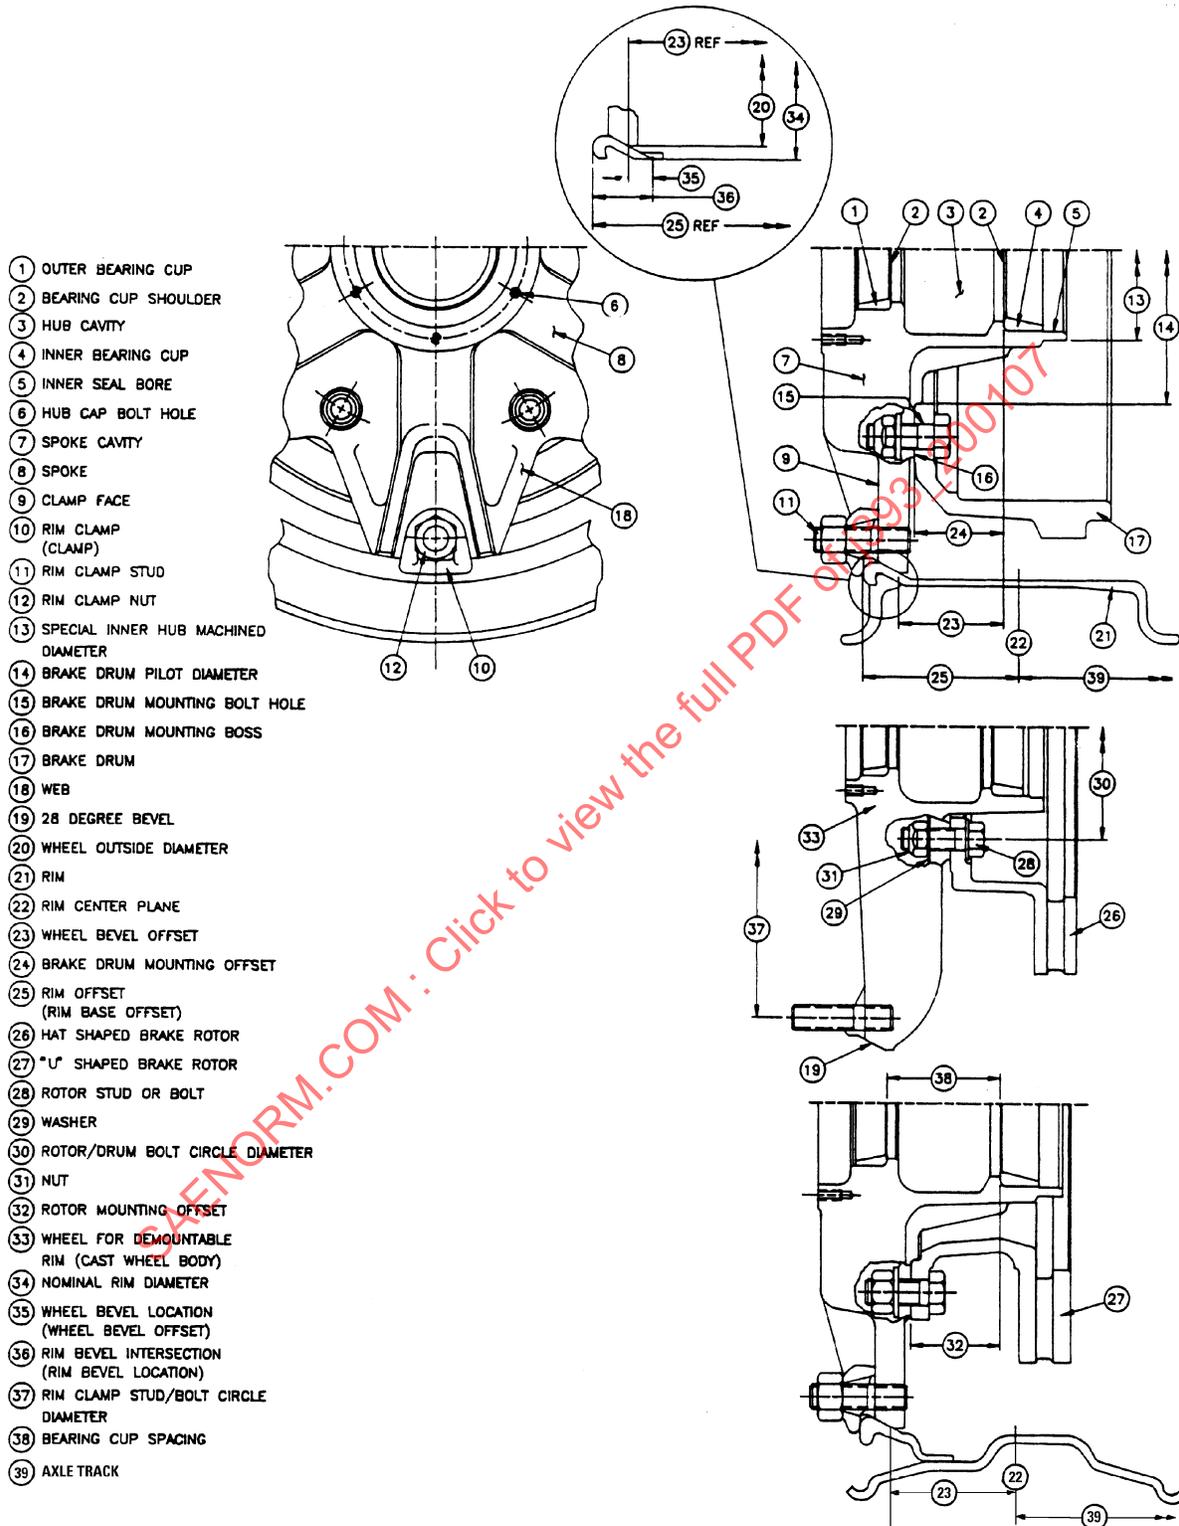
NOMENCLATURE, FRONT WHEEL FOR DEMOUNTABLE RIM
